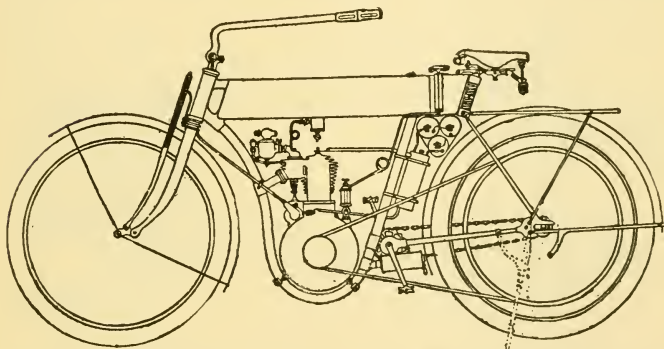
A belt drive motor cycle. As shown, the tension of the belt is adjusted by changing the position of the rear wheel axle. Another method of regulating the belt tension is by means of an adjustable idler pulley, illustrated in figs. 281 and 282. The above cut shows the general arrangement of the various parts, such as, carburetter, gasoline tank, ignition system, etc.
